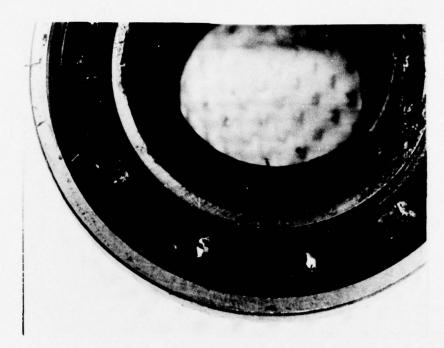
Bearing S/N TRL-7. Removed Position 4 With 20.4 Hours. 2.5x Enlarged View.
